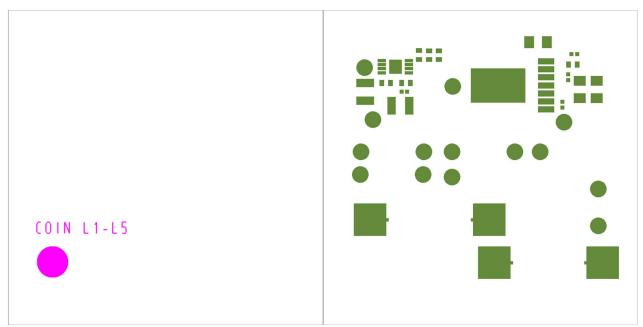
LH Coin layout board 2; RH Top solder mask board 2
